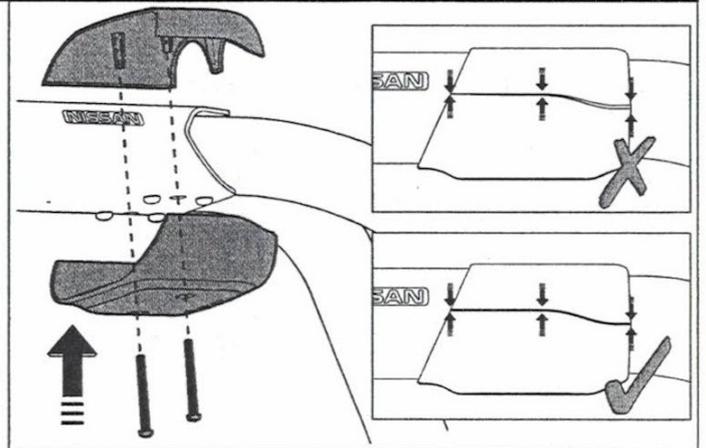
IMAGE ROTATED AND TUB REMOVED FOR CLARITY
